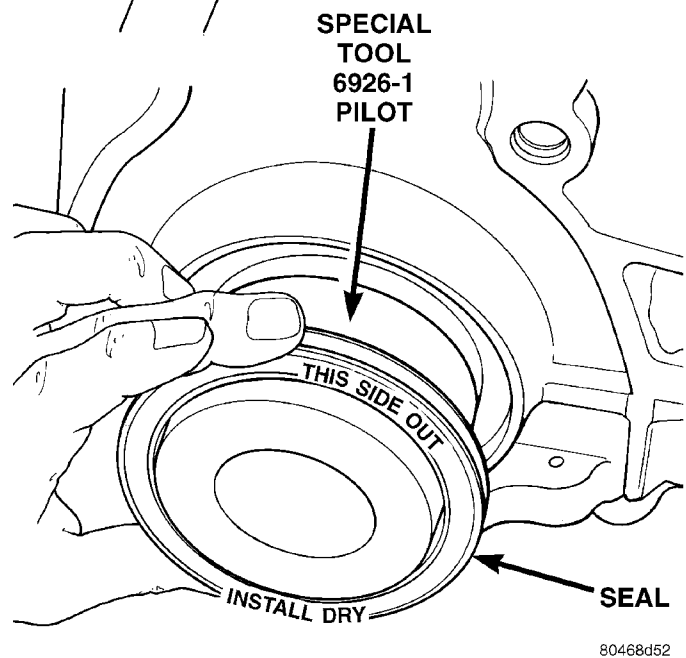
Rear Crankshaft Seal and Special Tool 6926-1
